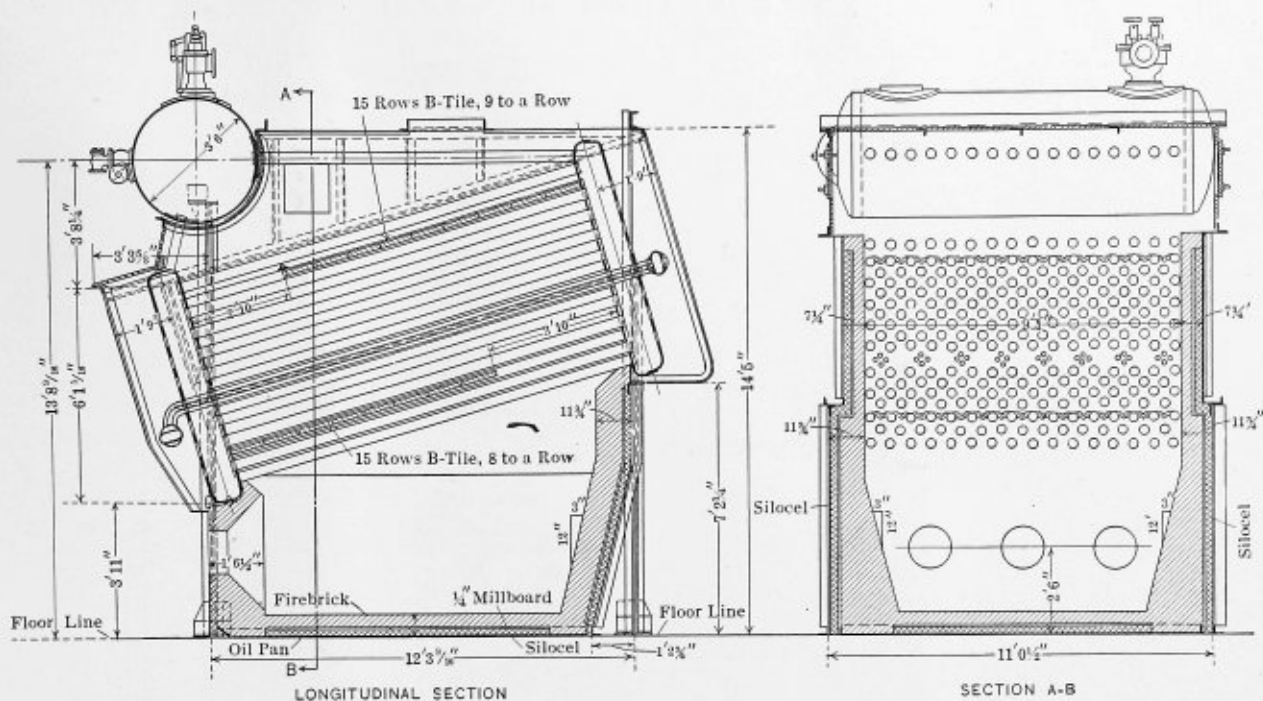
Arrangement of Setting for Heine Safety Boiler Built for the Emergency Fleet Corporation. This Boiler Has a Heating Surface of 3,170 Square Feet
